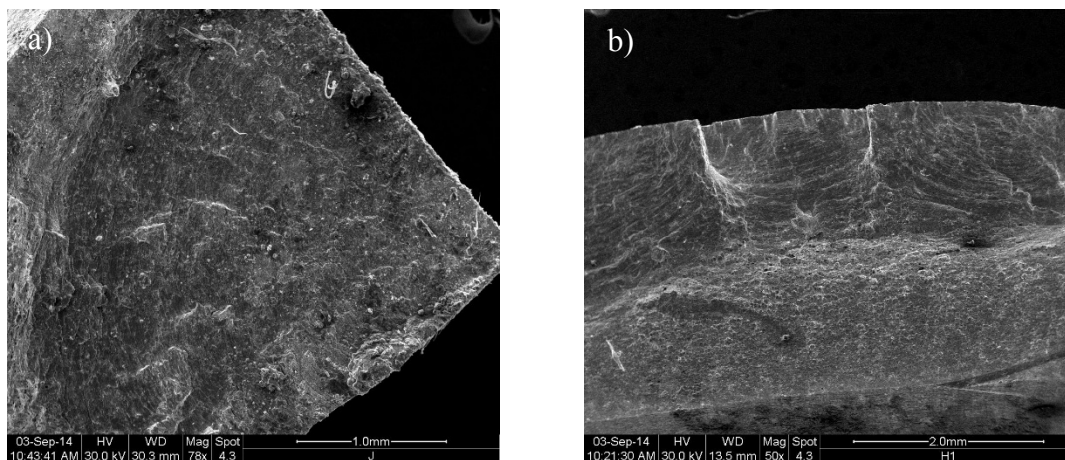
Fracture surfaces of smooth plane specimens (X60TT): a) LCF specimen, $\Delta\epsilon=1.2\%$; b) ULCF specimen, $\Delta\epsilon=6.0\%$ [4].
